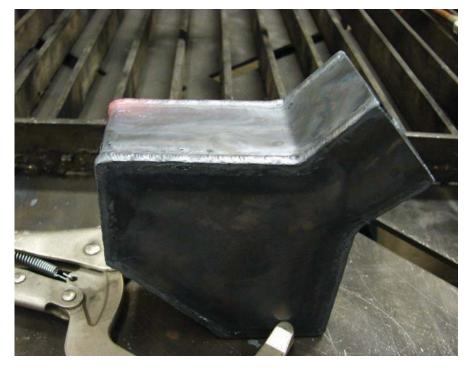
Weld the upper section of the 90-degree angled part..
